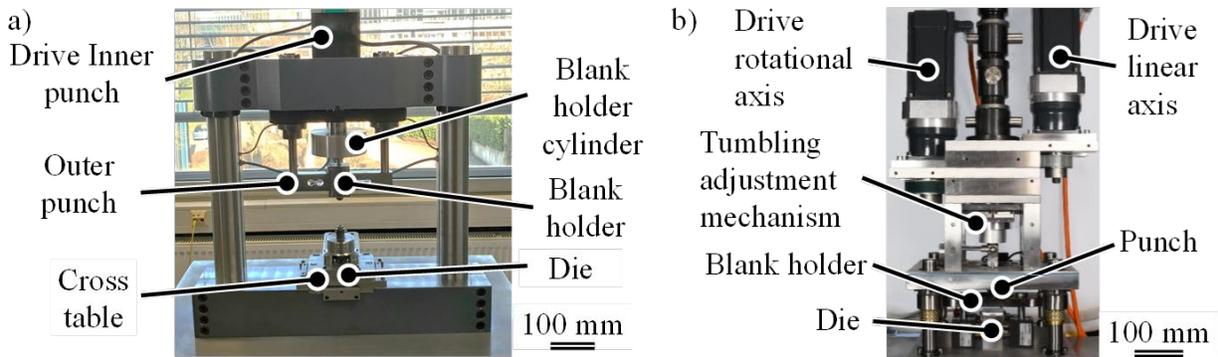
Tool setup of multi-range self-piercing riveting a) and tumbling self-piercing riveting b)
